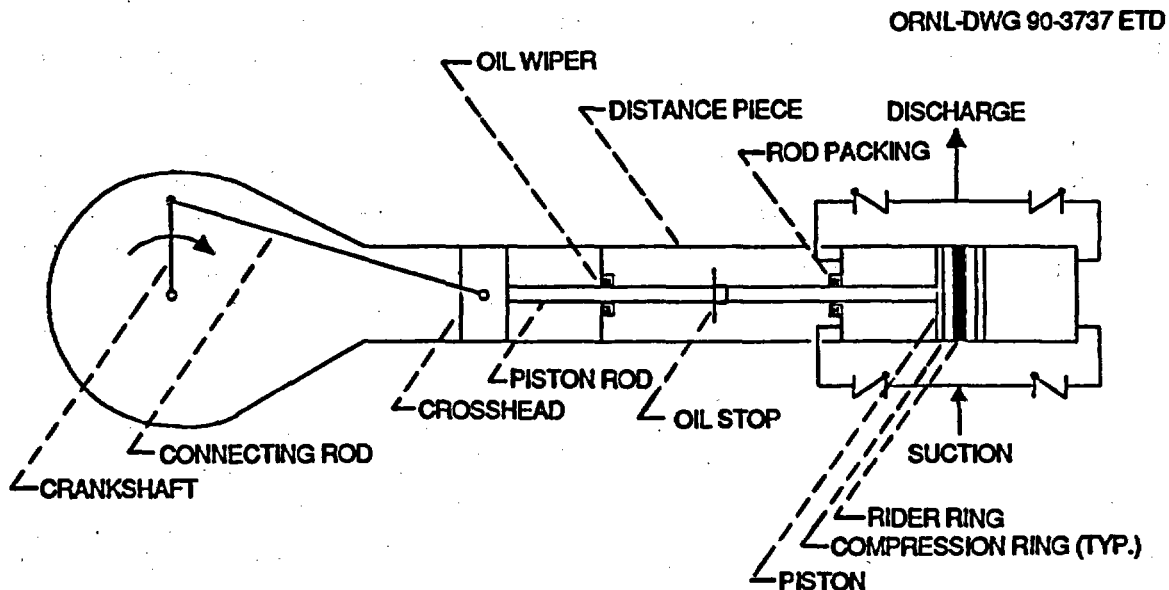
Nonlubricated reciprocating compressor schematic.
